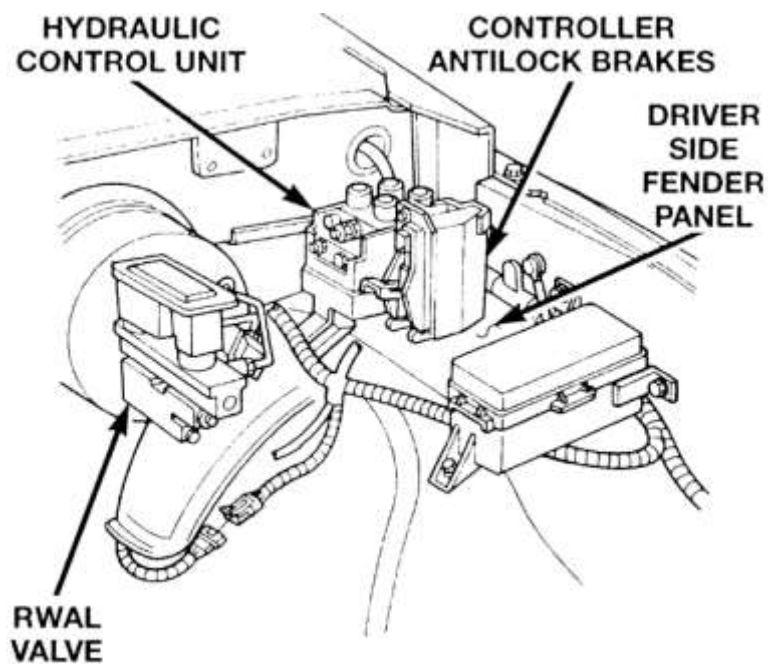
Location of Hydraulic Control Unit in car engine.
